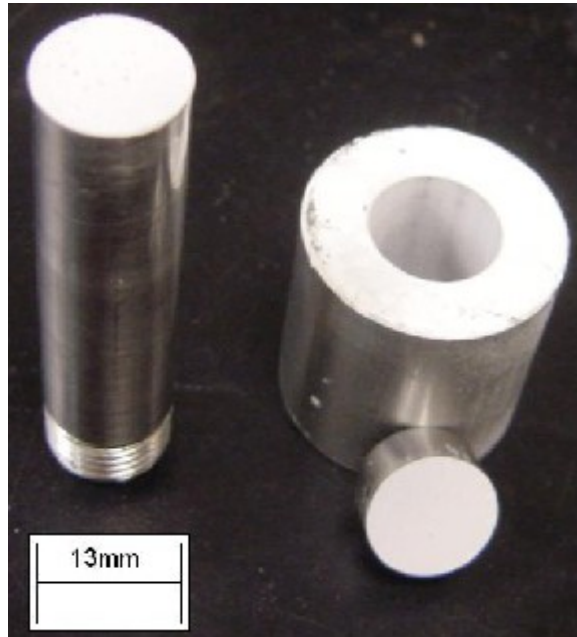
Stainless steel squeeze casting fixture: long threaded plunger and a cup with removable plug.
